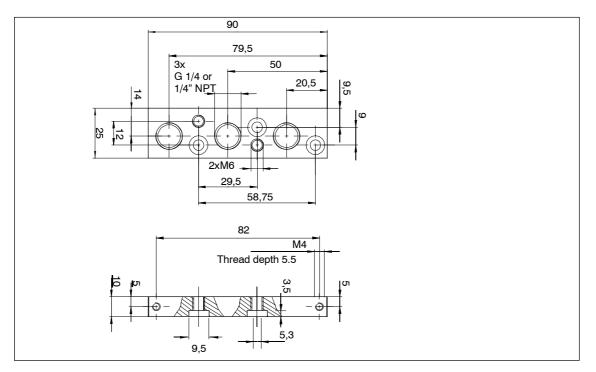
Dimensional drawing terminal strip for plastic housing
